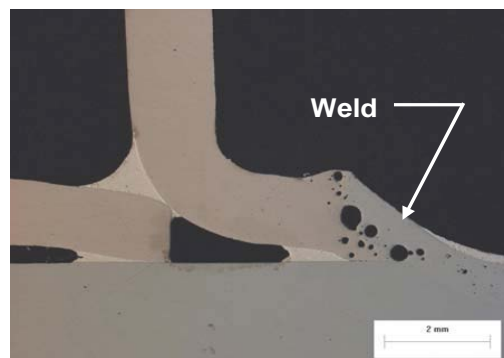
Assembly #5 Braze Joint Voids with Porosity in Adjacent Weld
